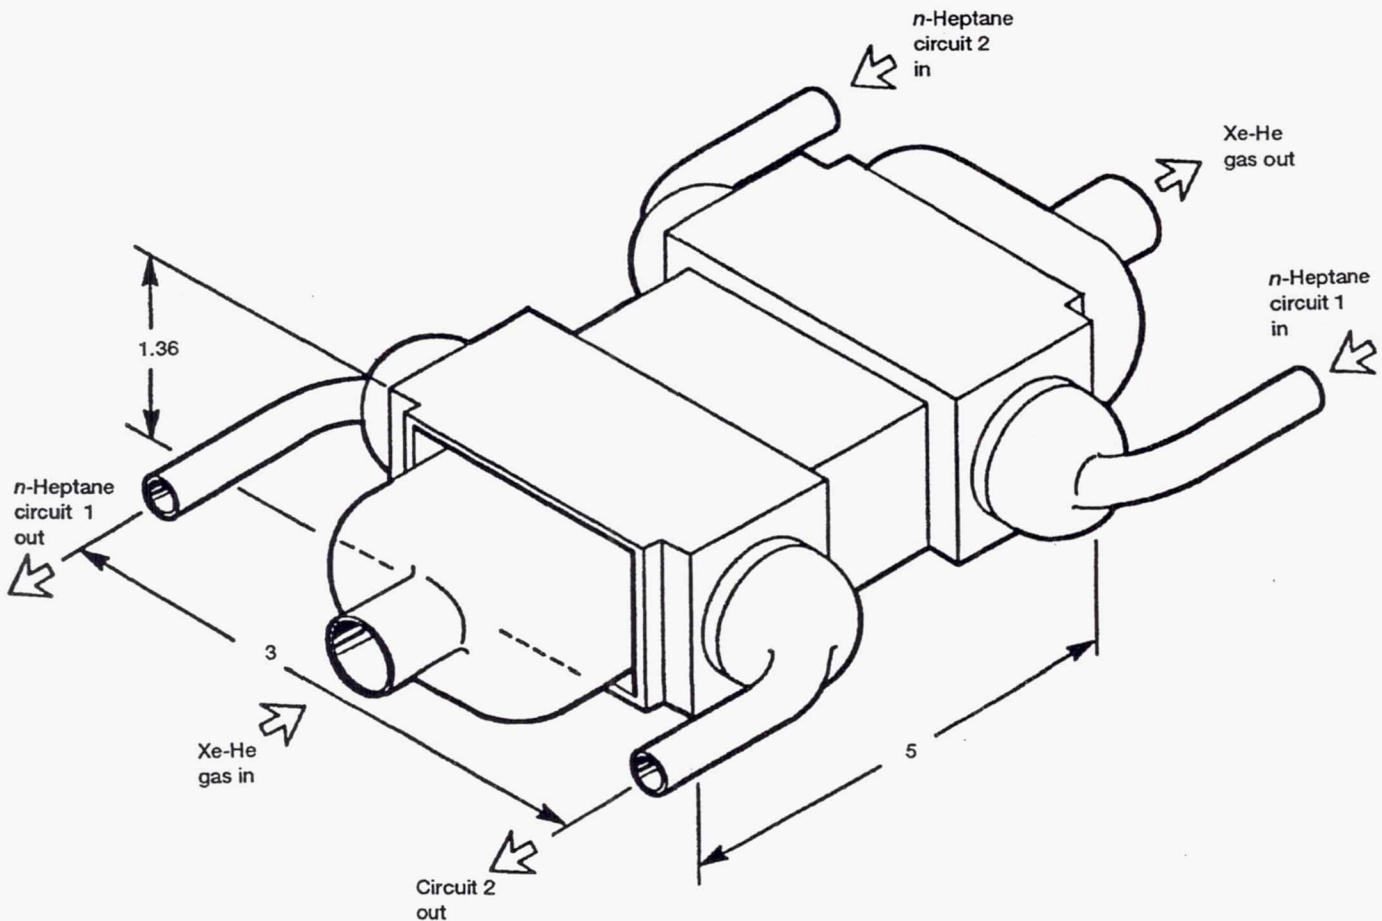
Dual-fluid, counterflow, plate-fin bleed cooler. (Dimensions are in inches.)
